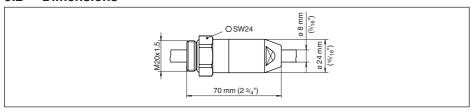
Dimensions, cable gland connection cable IP 68/IP 68 (1 bar)
